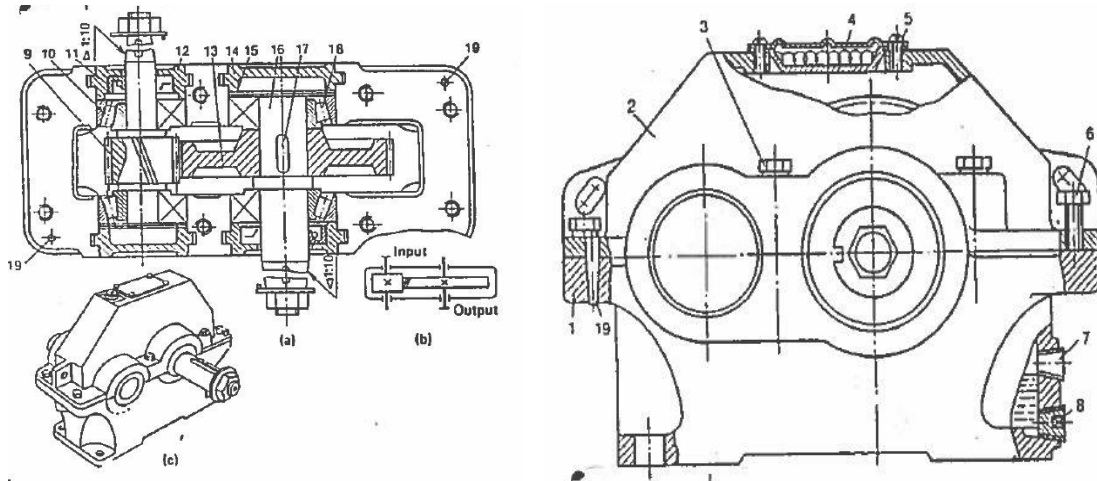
Single-stage cylindrical-gear speed reducer: (a) front view; (b) mechanical diagram; (c) general appearance
